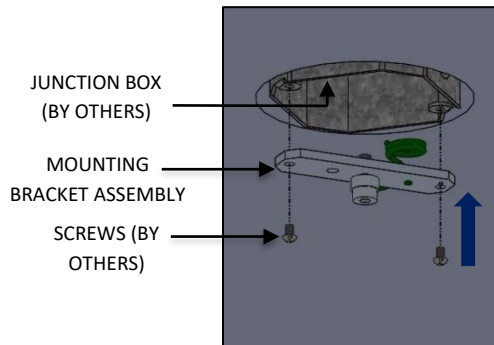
MOUNTING BRACKET ASSEMBLY INSTALLATION
